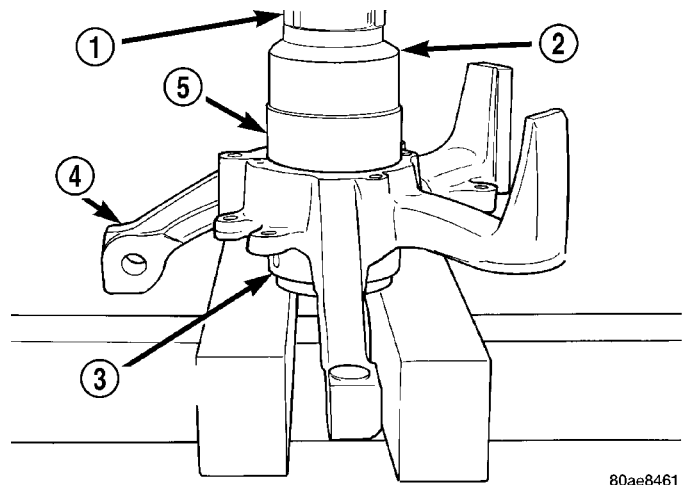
Pressing Wheel Bearing Into Steering Knuckle
